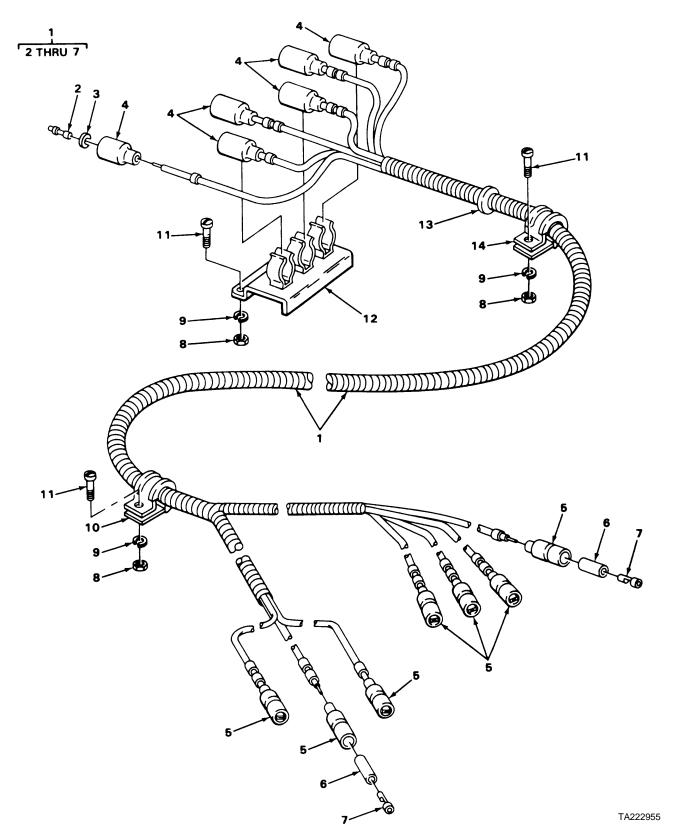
CHASSIS WIRING HARNESS FOR BLACKOUT STOPLIGHT ASSEMBLY.
